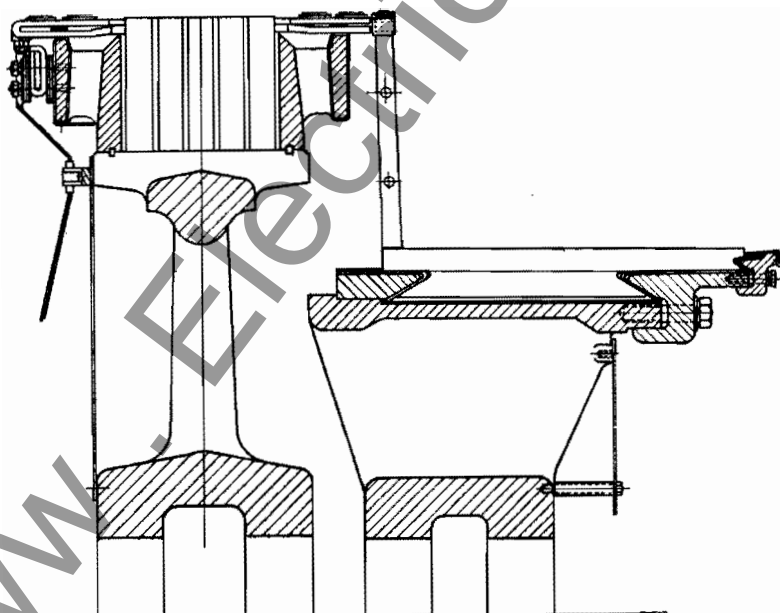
SECTION OF COMMUTATOR SHOWING 3V TYPE OF CONSTRUCTION
